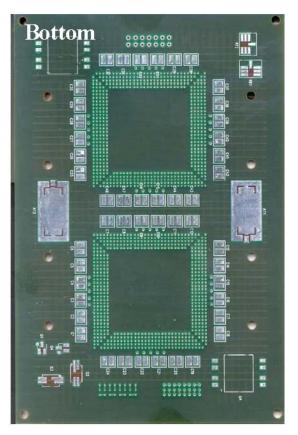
Printed Wiring Board Design Showing Package Daisy Chain, Probing Pads, and Via Daisy Chains
